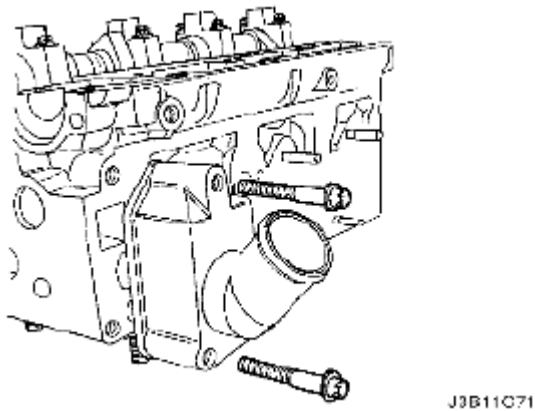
Identifying Coolant Bypass Housing Mounting Bolts And Housing
